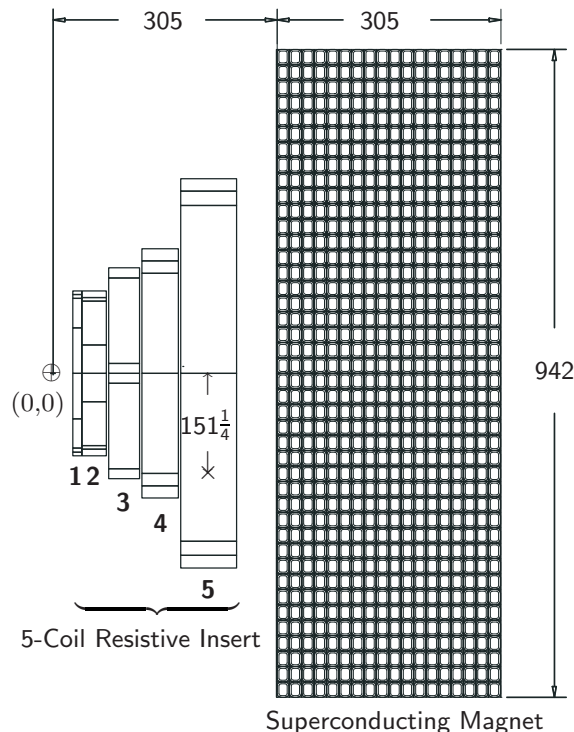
Cross sectional view of one half of the SCH magnet at the NHMFL [9.1]—the superconducting “shield” coil (of radius  $\sim 1$  m) is not shown here. The winding dimensions, in mm, are approximate;  $\times$  (in Coil 5) marks its magnetic center after a fault mode, discussed in the  $Q/A$  section.
